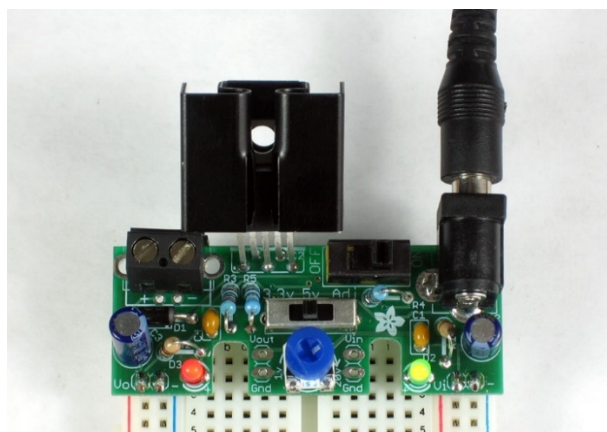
Assembled Adjustable Breadboard Power Supply Kit
